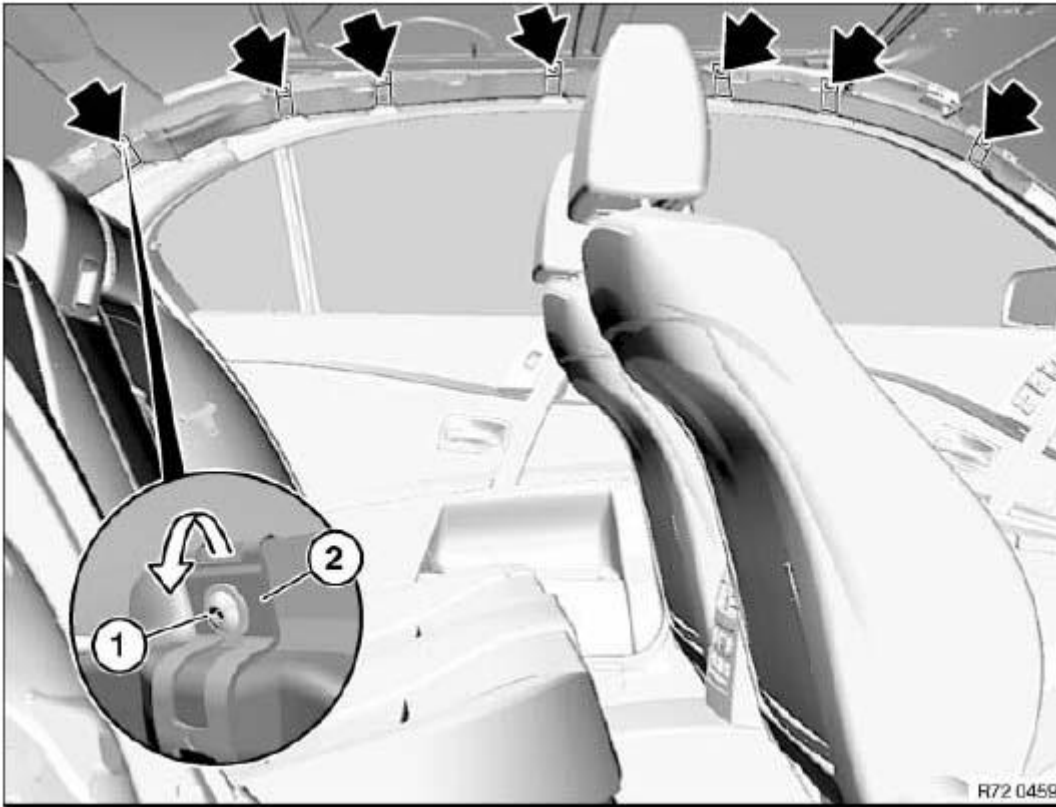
Feeding Holders Out Of Sheet Metal Flange
